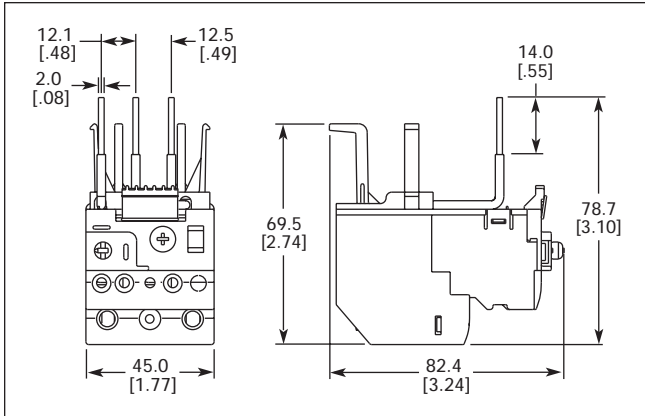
45 mm C396 (0.1 – 8A) Direct Connect to XT Frame C Contactor — Approximate Dimensions in mm [in]
